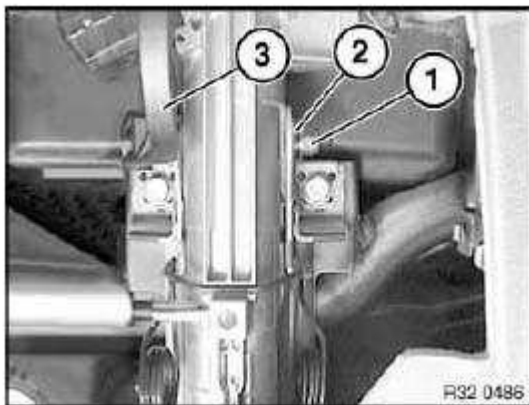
Nut, Needle Bearing And Adjusting Lever
